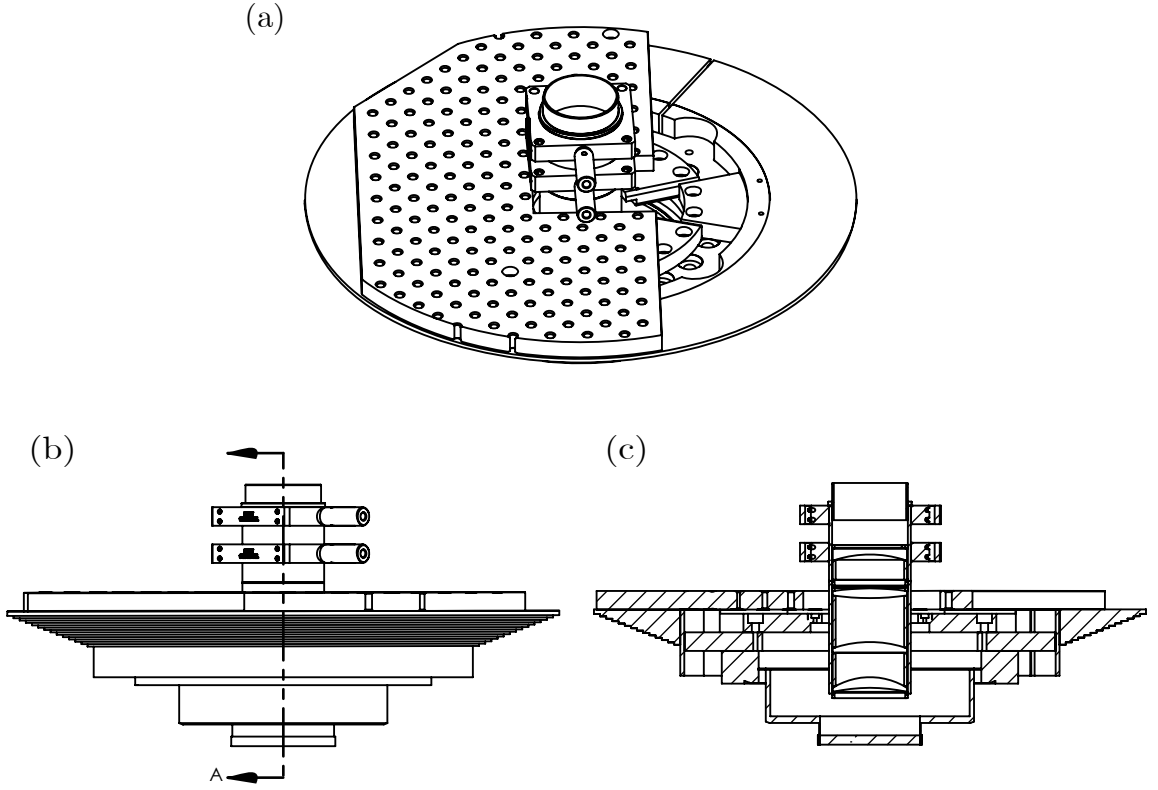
Mount for the objective. (a) Isometric view of the objective, top coil mount and custom breadboard. (b) Side view of objective mounting assembly. (c) Cross section of (b) showing the lens tube housing the imaging objective mounted on the science chamber.
